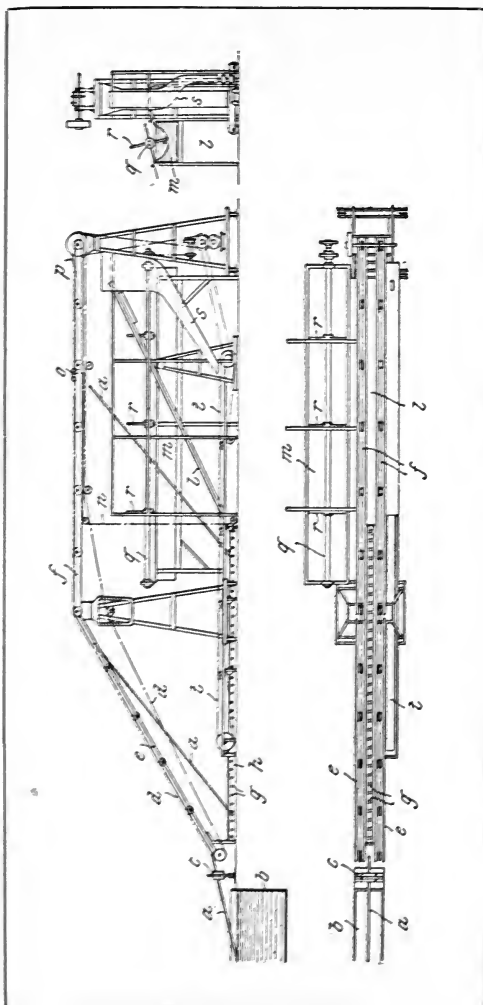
PLAN AND ELEVATION OF ARRANGEMENT FOR GALVANIZING TUBES
